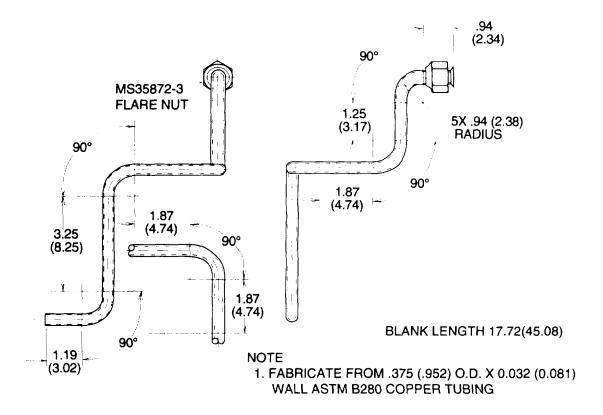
Tube, Solenoid N. C. to Sight Glass, Part Number 148K0225-1/T
